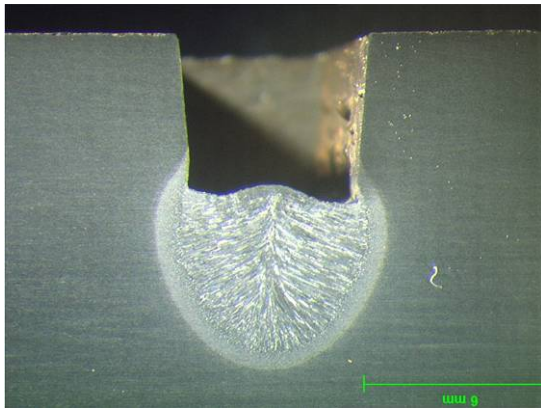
Welding Parameter Trials / Overhead Position
